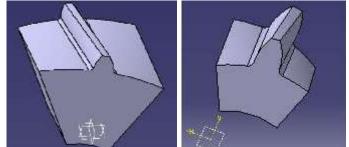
Model of Single helical pinion tooth profile Figure 4. Model of Helical Gear tooth Profile
